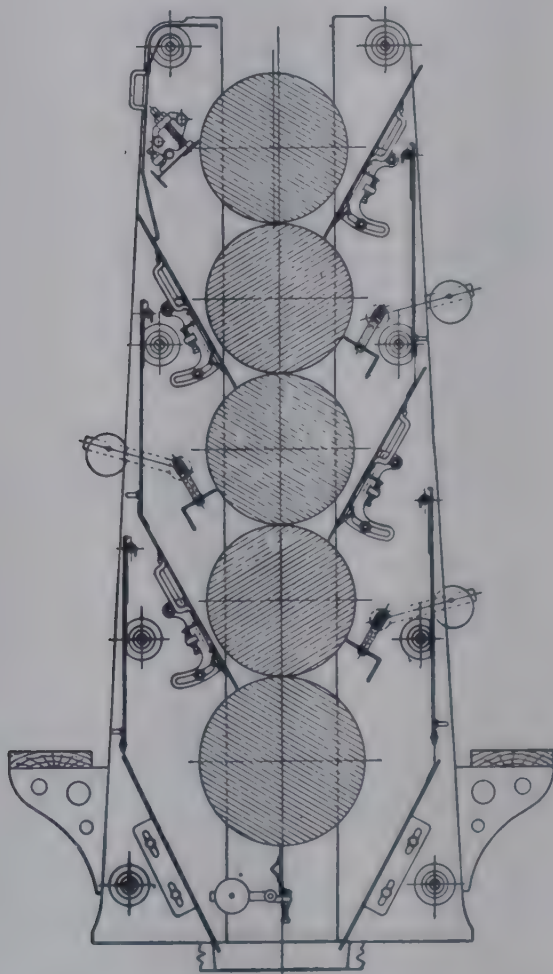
Five-high crushing rolls, cross section (courtesy *The French Oil Mill Machinery Co.*).
